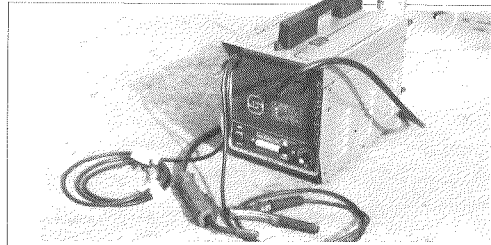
MIG welder: the greatest advance for the DIY body restorer since Professor Potts' patent pink pills. Easy to learn how to use. Go for BOC 'Argonshield' gas bottle/regulators as soon as proficient/finances allow - works out much cheaper than disposable gas bottles. Some type of 'hot' flame is also very useful for brazing and assisting the removal of stubborn nuts etc.
